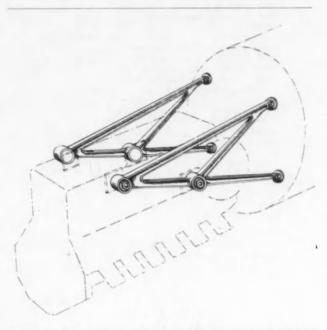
Method of mounting the DB-601A engine in the Heinkel He.IIIK airplane
